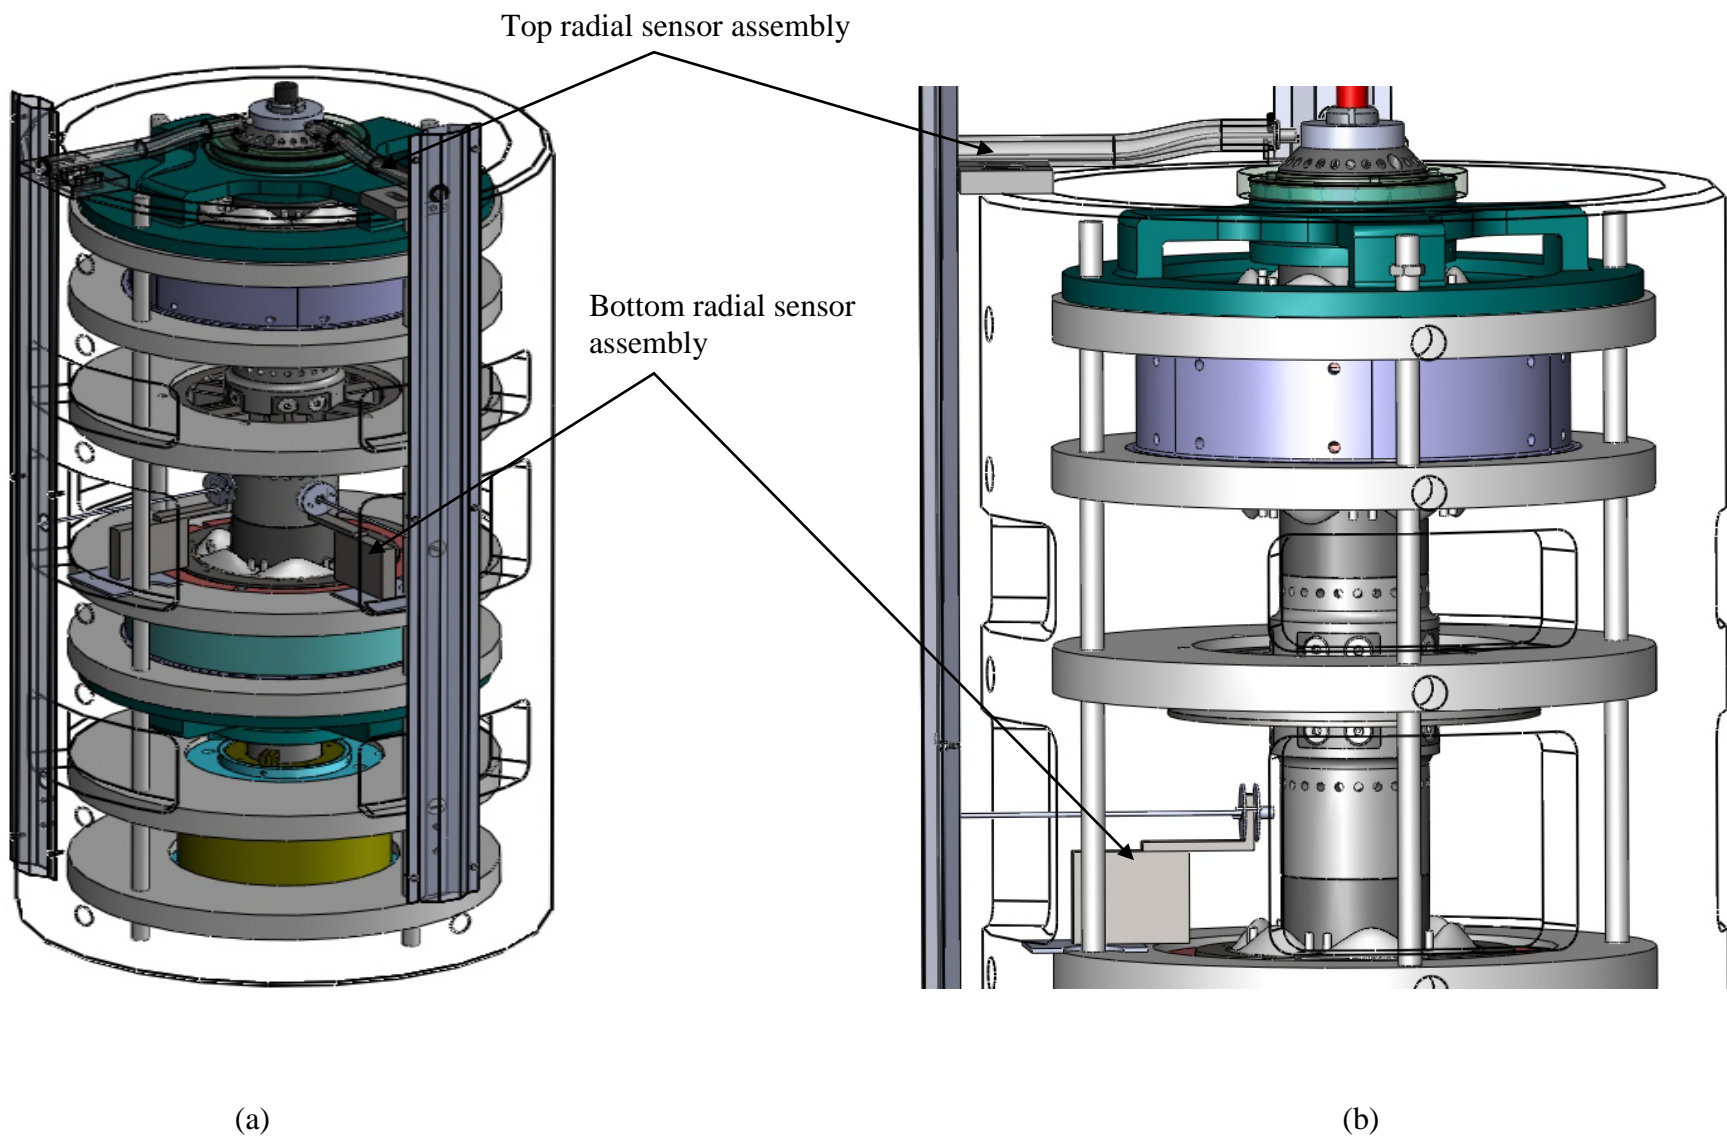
Radial sensor holders mounted on the EEC universal test rig system
